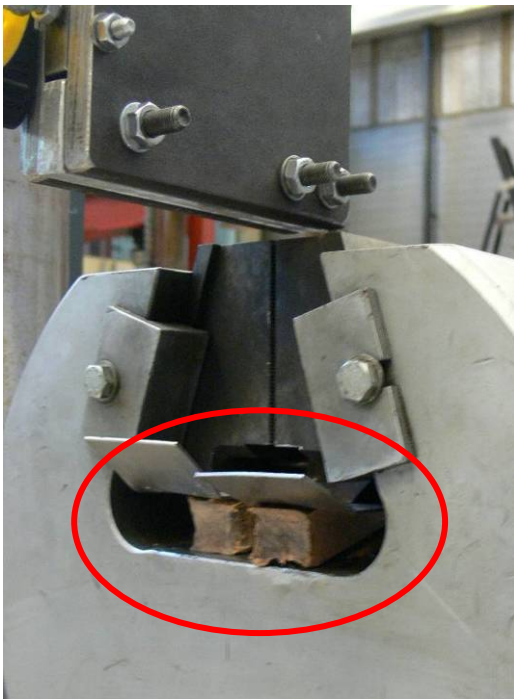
, Lower wedge clamp with wooden wedges encircled in red
